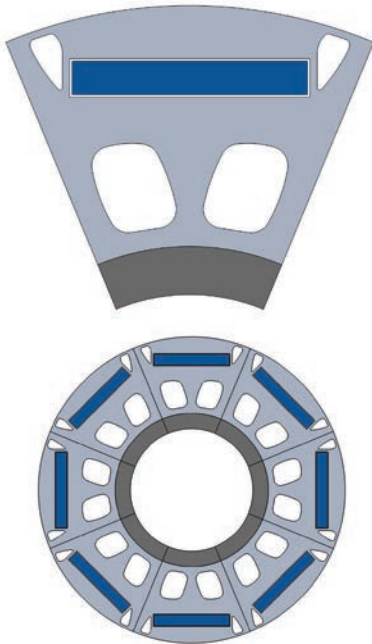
A typical rotor setup with the rotor plates, shaft, and magnet.
